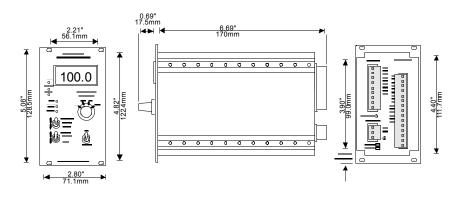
Model OUM670 Forward Scatter Turbidimeter Module Dimensions
